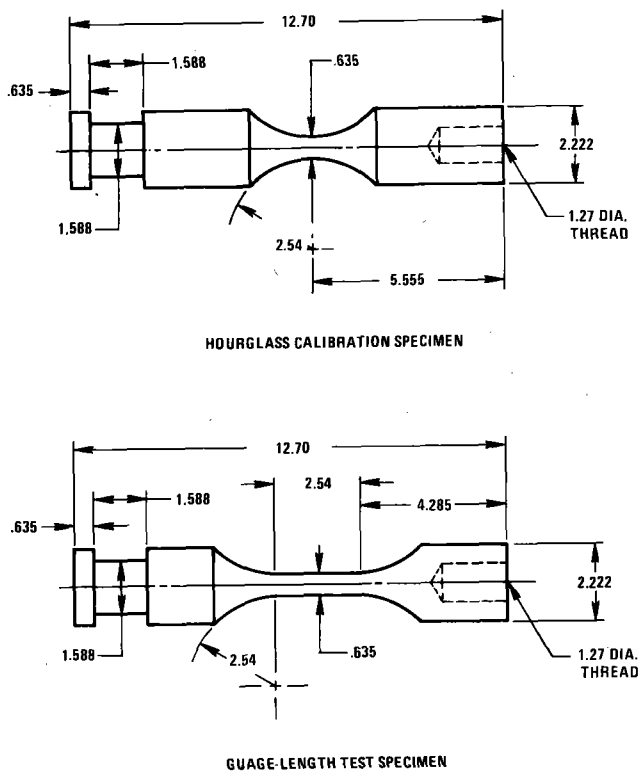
Calibration and test specimen configurations for fatigue testing in sodium (dimensions in centimeters)
